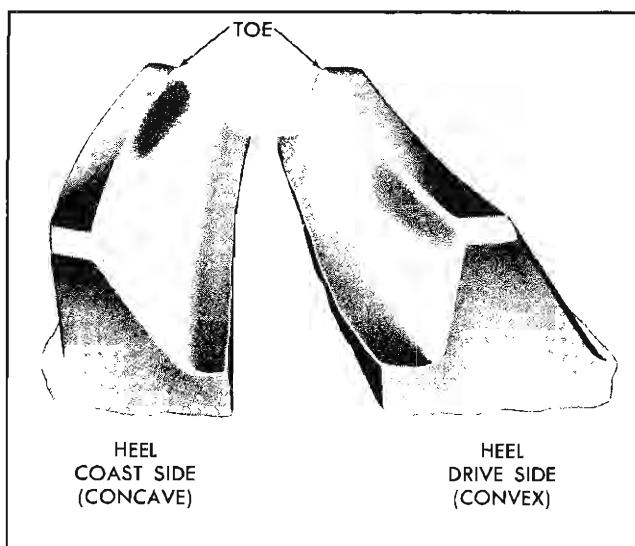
Tooth Pattern—Pinion Too Far Away from Ring Gear
